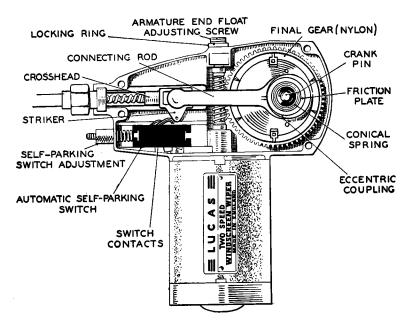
Showing the DR1 wiper motor with cover plate removed.
